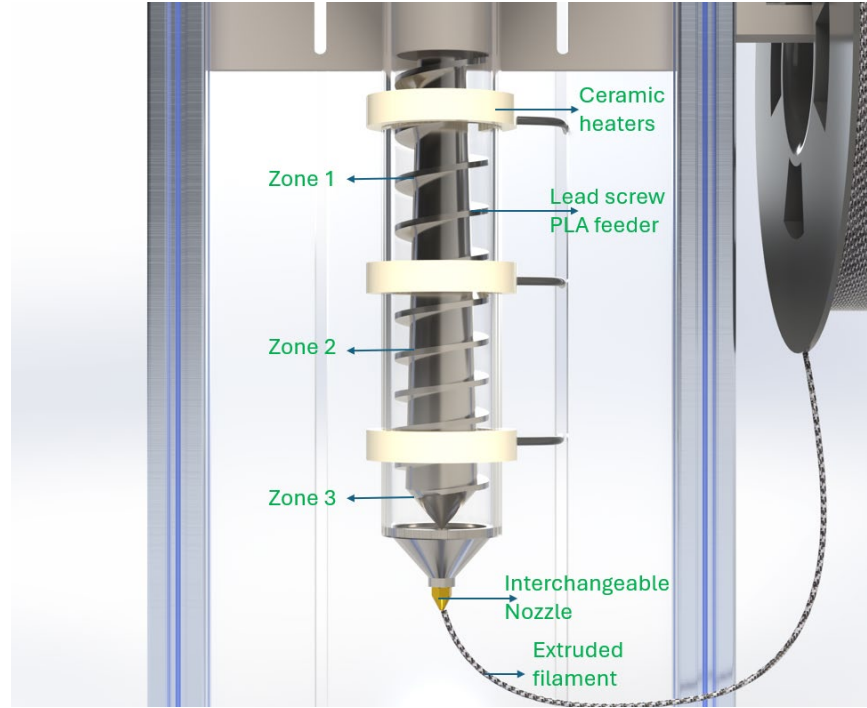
Cross-sectional View of the Extrusion Barrel and Nozzle Assembly
